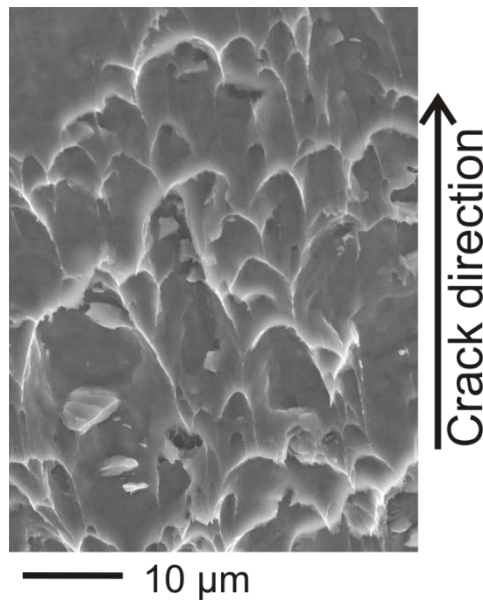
SE image of aluminum fracture surface shows ductile failure
